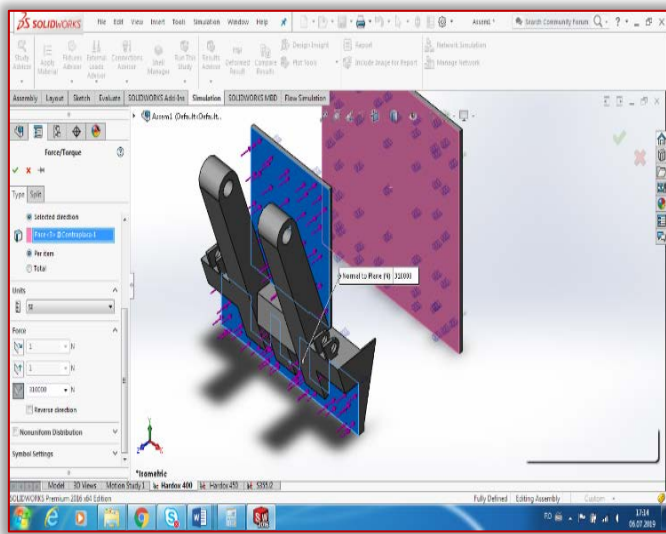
Isometric view compaction plate assembly – exhaust plate
